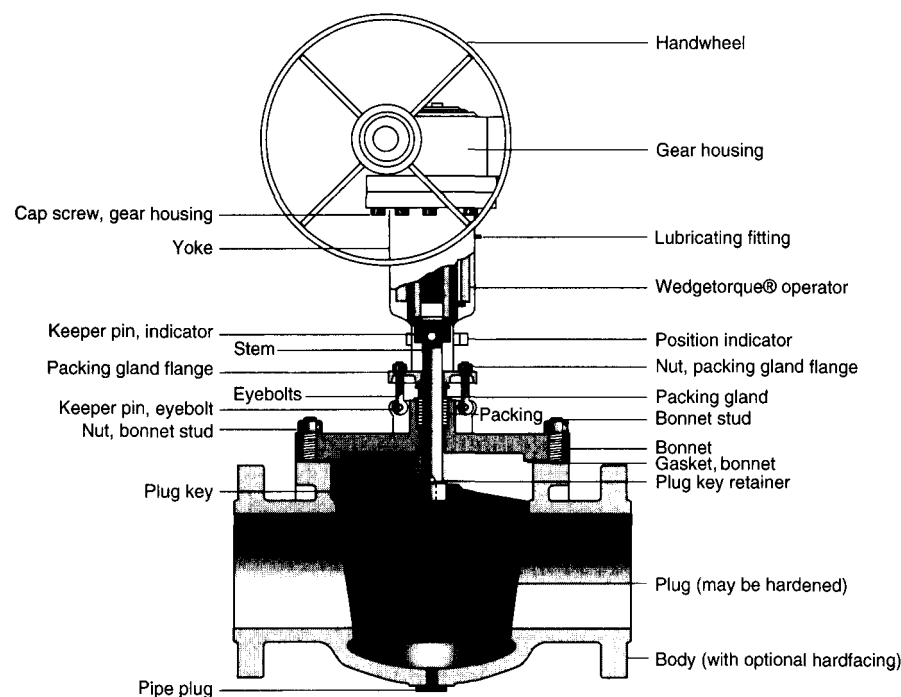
Two-way plug valve. Courtesy Crane Company.
